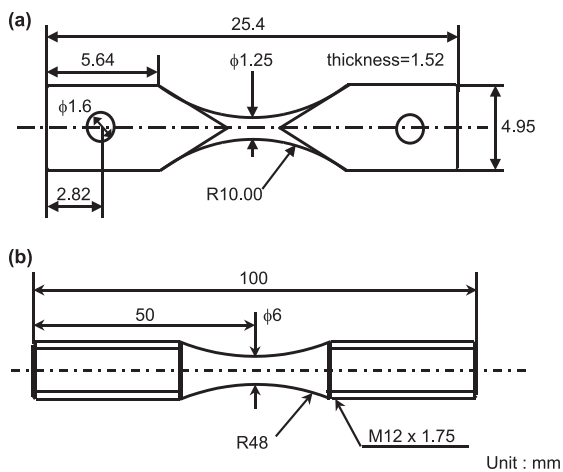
Dimension of specimens used: (a) mini-sized specimen; (b) full-sized specimen.
